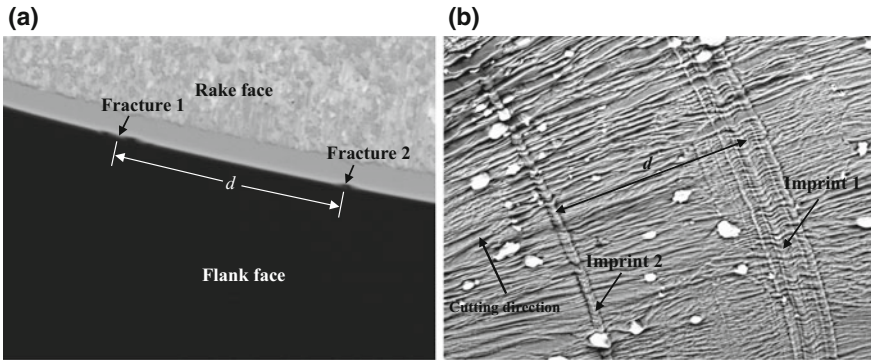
Tool micro-crack and the related imprints on the chip surface
